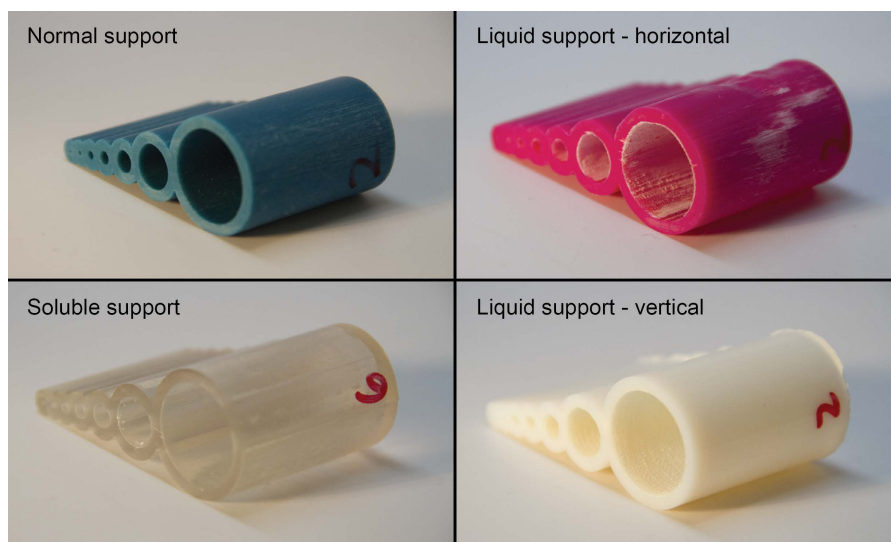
Macroscopic optical images of test pieces printed to evaluate support methods.
